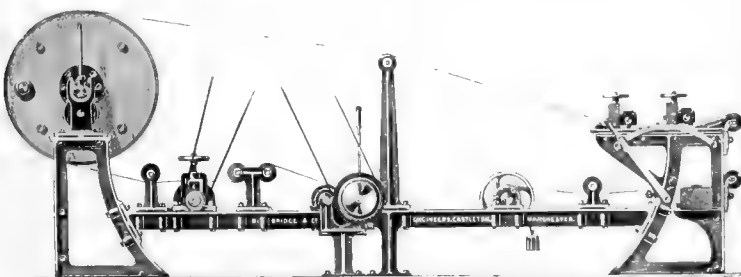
COLD CURE AND ELECTRIC FINISHING MACHINE.
